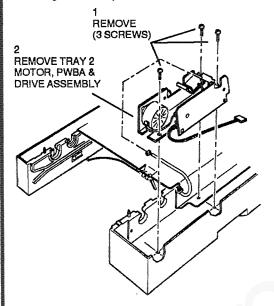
Tray 2 motor, PWBA & drive assembly removal
